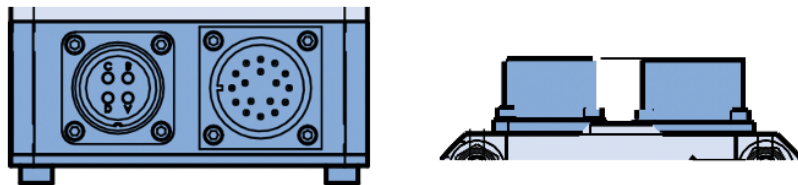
Drawing of box mount connectors used on some ServoWeld actuators.
